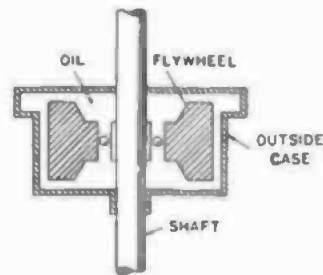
Cross-sectional view of RCA rotary stabilizer.
